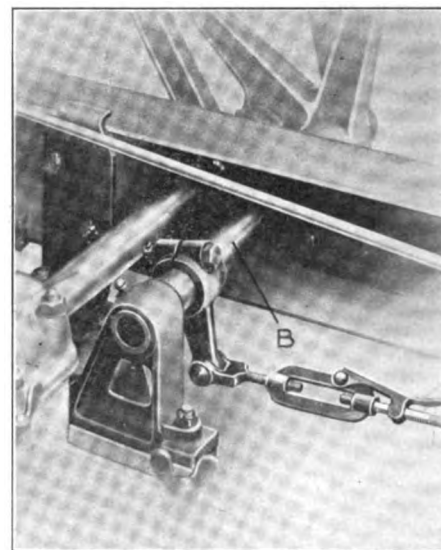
SEPARATE CROSS SHAFT MOUNTING
